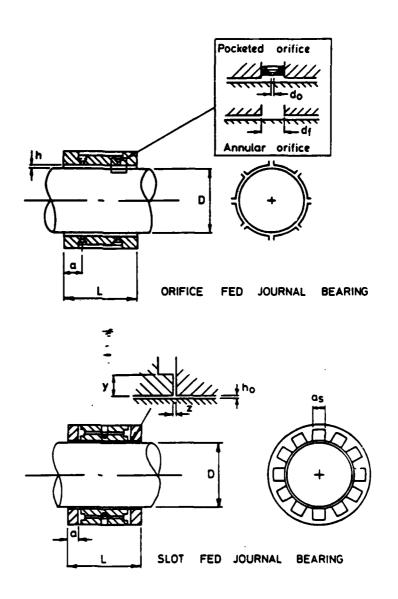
TYPICAL GAS BEARING AND PLAIN HYBRID BEARING CONFIGURATIONS . •
